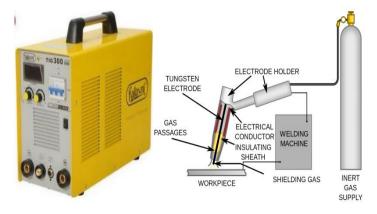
TIG Welding Machine and TIG Welding Setup
